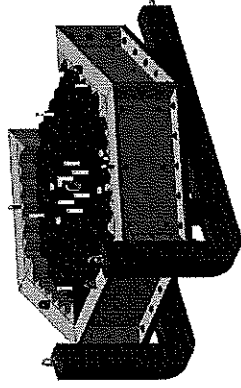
RENDER OF THE MOLD WITH THE TOP PLATE, FRONT PLATE, AND GAS SLEEVES INSTALLED. AT THIS STEP, ALL VOID ASSEMBLIES WOULD BE INSTALLED.
